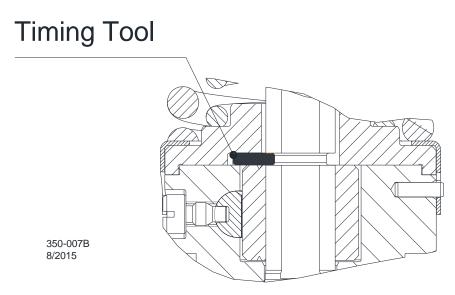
Use of Gauge Tool to Fix Plunger Position
